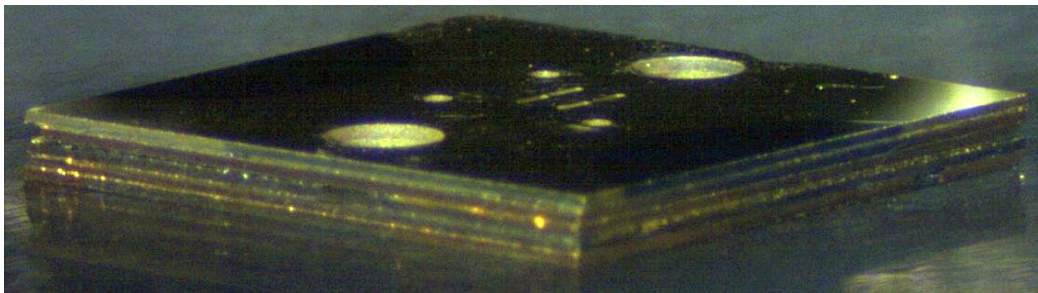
Side view of the 2x2 antenna array before mounting the top layer, taken by the bonding machine camera.
